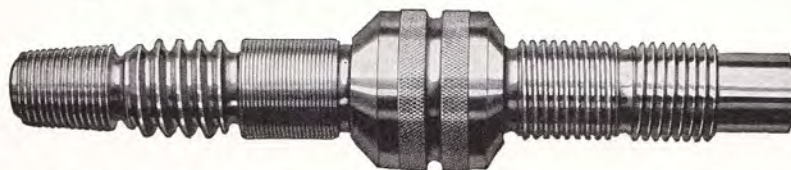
Sample threaded piece showing various types of threads cut on a 9-inch "Workshop" Lathe.
